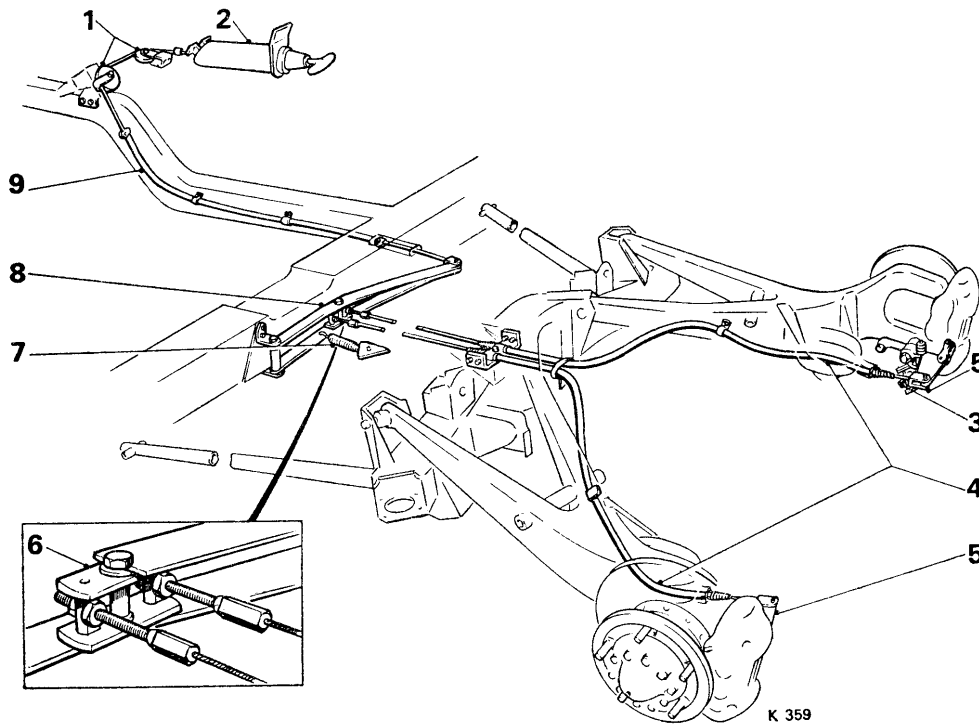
HAND BRAKE LINKAGE—EARLY R.H.D. CARS
